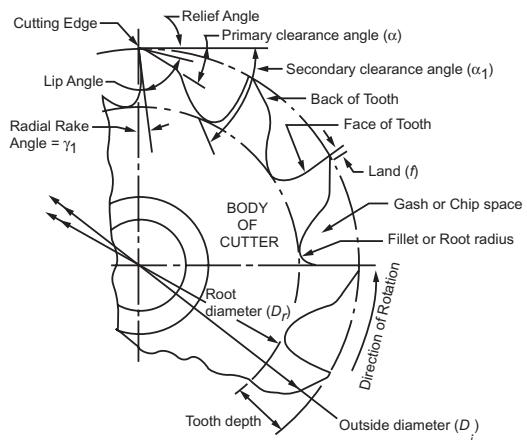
Nomenclature and geometry of milling cutter.
